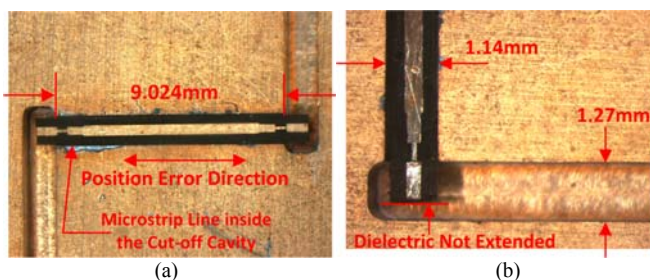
The Final Assembly (Microstrip Lines inside the Metal Case). (a) View of the Complete Microstrip Section. (b) Detail
